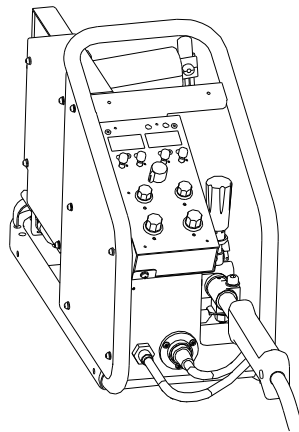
Schematic diagram of connecting the welding torch to the wire feeder
